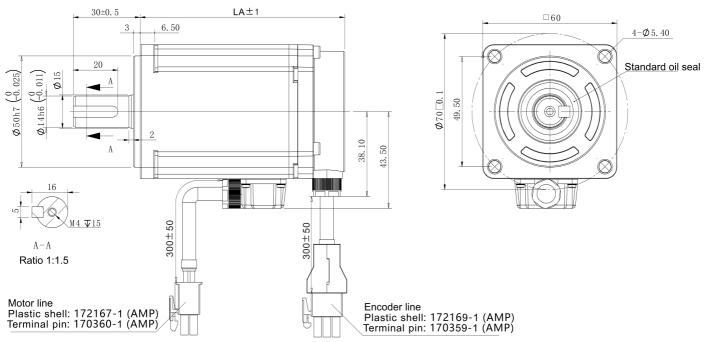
Installation dimension of WD series 60 flange servo motor
